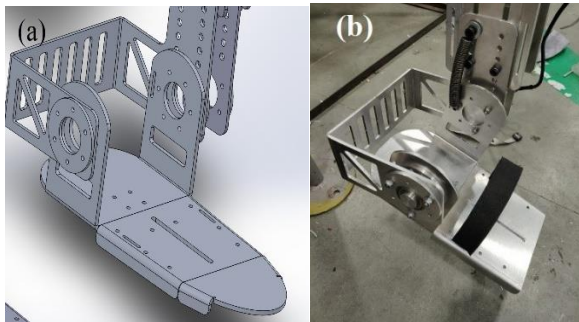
(a) CAD model of ankle joint (b) Actual ankle joint
